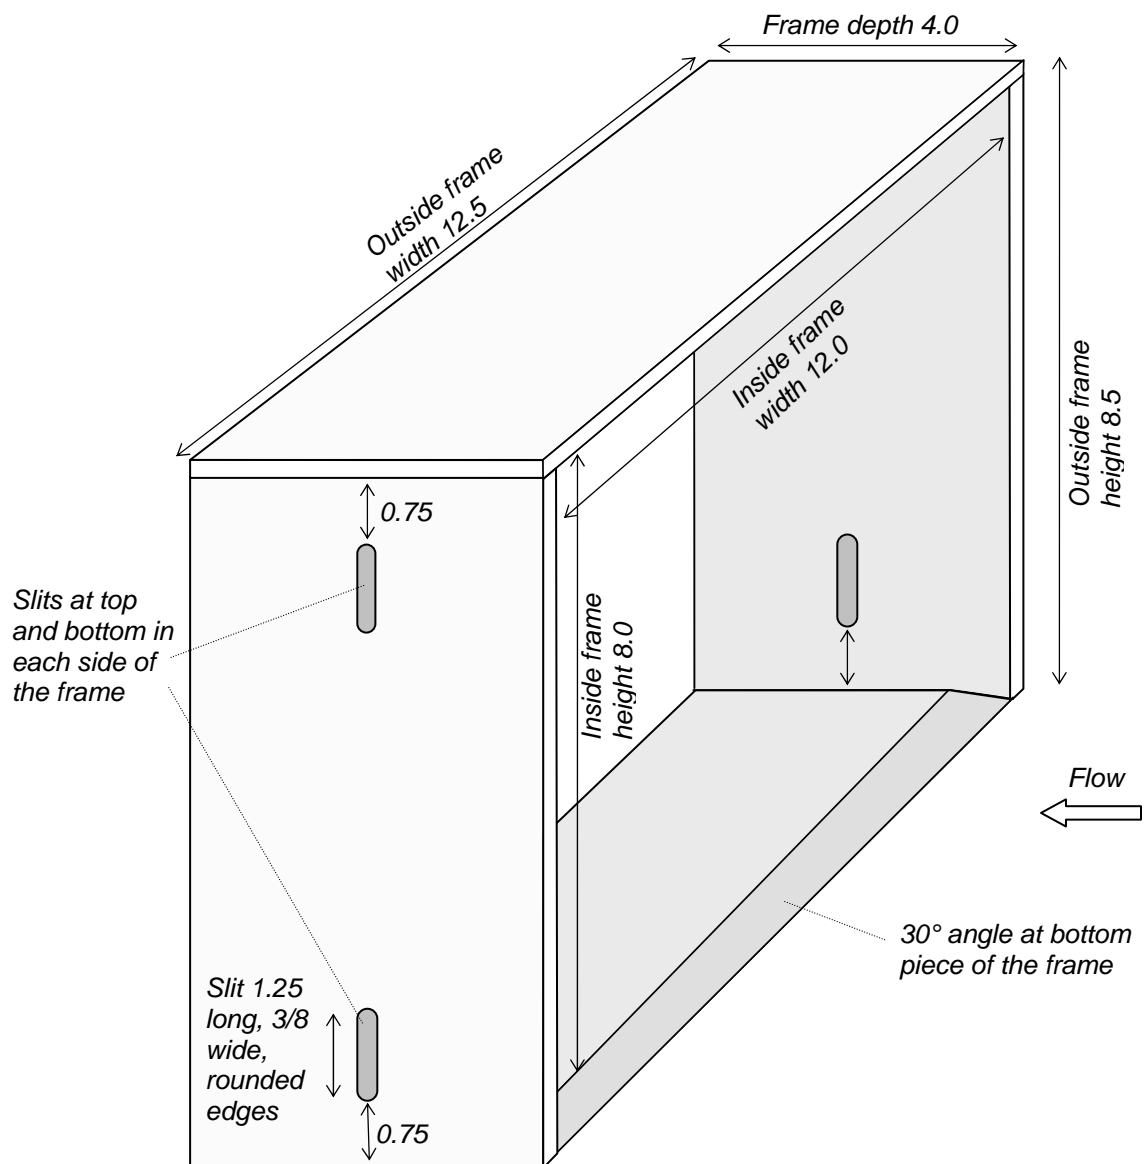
Detail view of the frame with slits and beveled front edge (all measurements in inches; oblique view)
